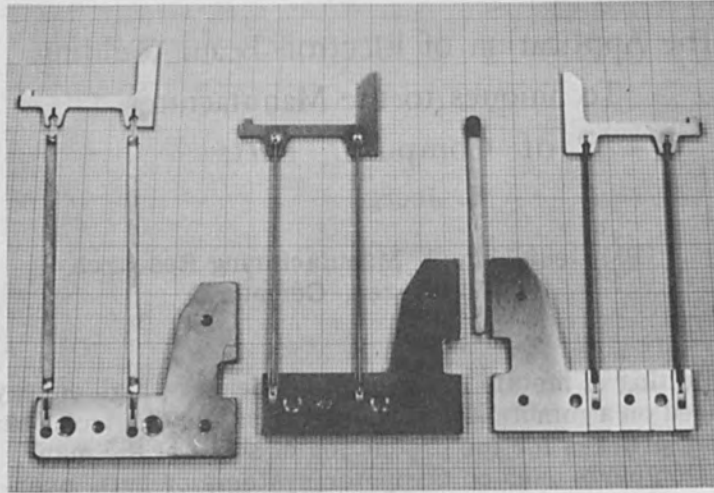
Socket, 2 leaf springs, hammer. Top view (center) and bottom view (right) of hammer assembly.
